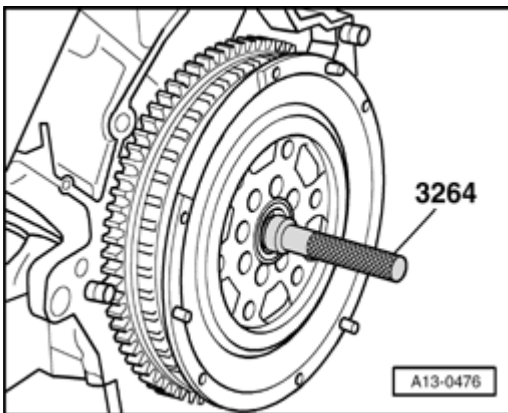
Driving Needle Bearing Into Dual-Mass Flywheel Using Bearing Driver 3264
